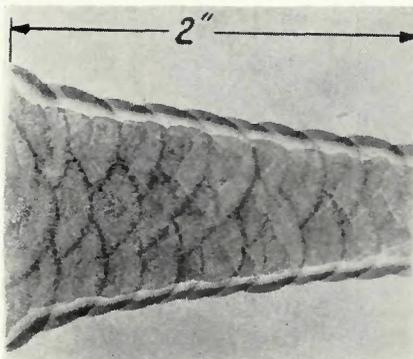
"Mini-joint" weld in HY-80 steel
